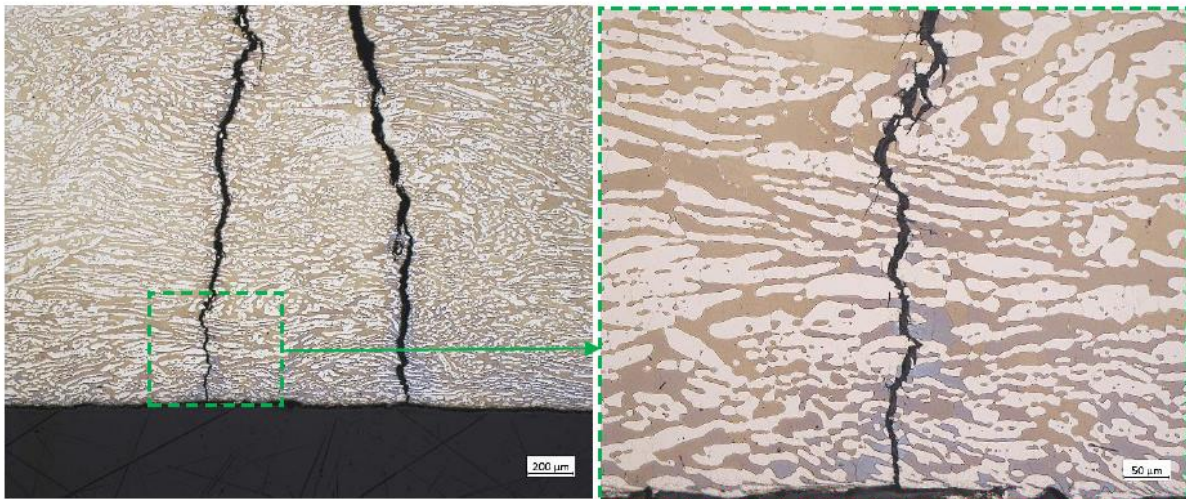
The sample is taken in parallel with a weld, and the crack in the relevant cross-section therefore runs first through weld metal and then base material towards the inner surface. (Photos: Equinor)
